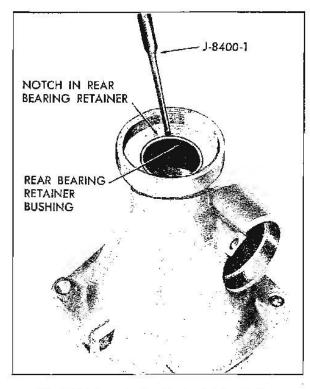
Removing Rear Bearing Retainer Bushing
